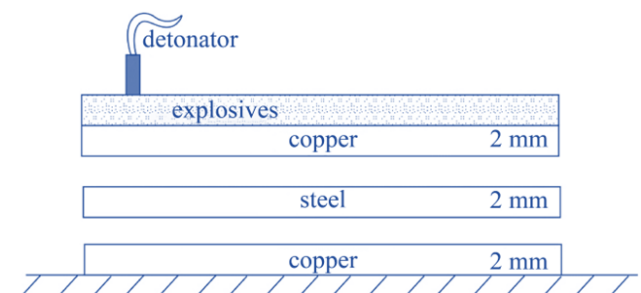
Experimental setup for the explosive welding by Gladkovsky et. al [27]
